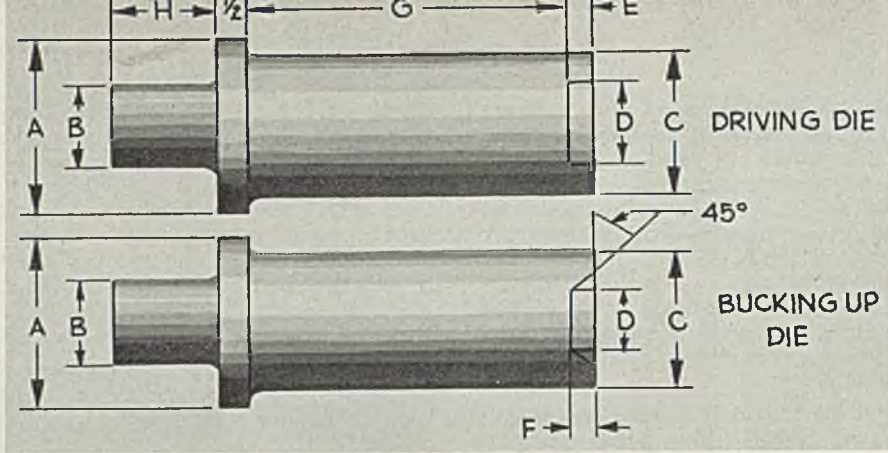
Driving and bucking-up dies recommended for cold riveting work. Dimensions are given in Table I
